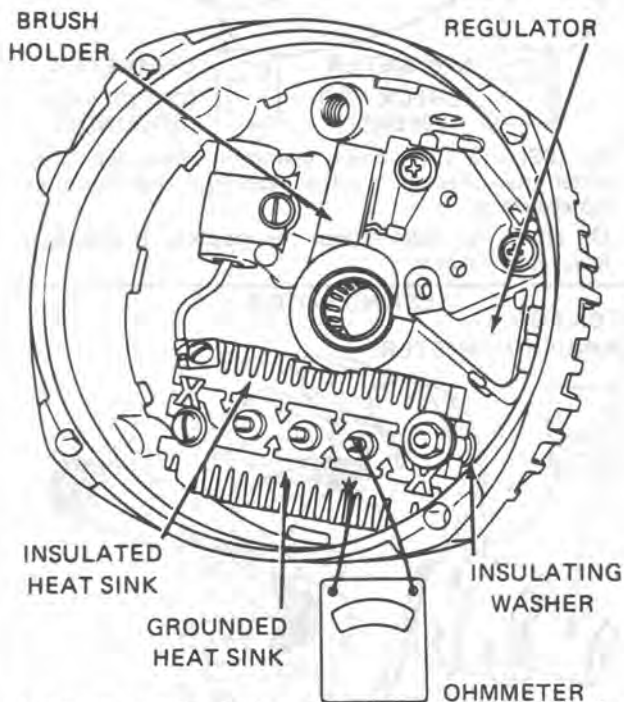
Generator Disassembly, Test and Reassembly 1 of 3
